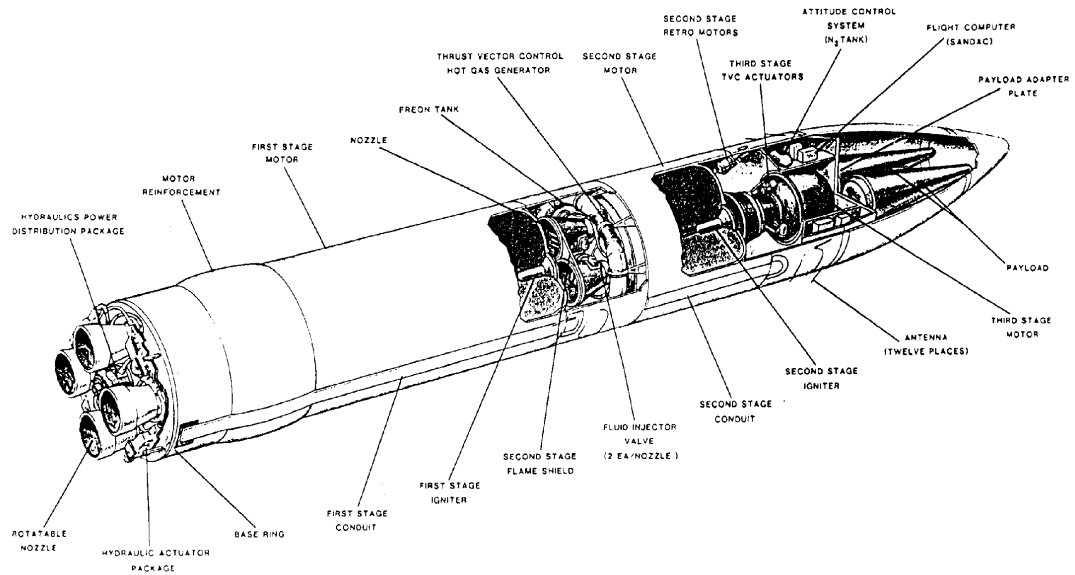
Strategic Target Systems (STARS) Cutaway Drawing
